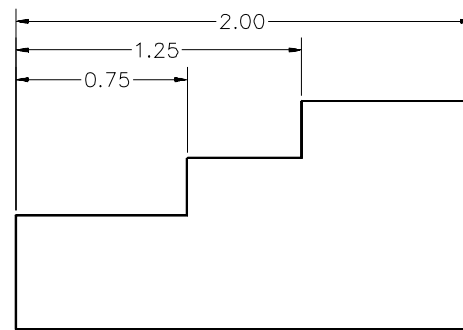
Drawing for Exercise 3, after editing dimensions
